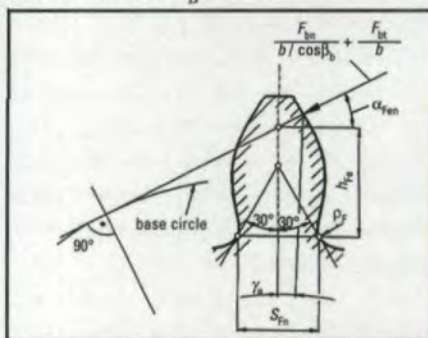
Determination of the normal chordal dimensions of the tooth root critical section for Method B. Based on ISO 6336-3.
